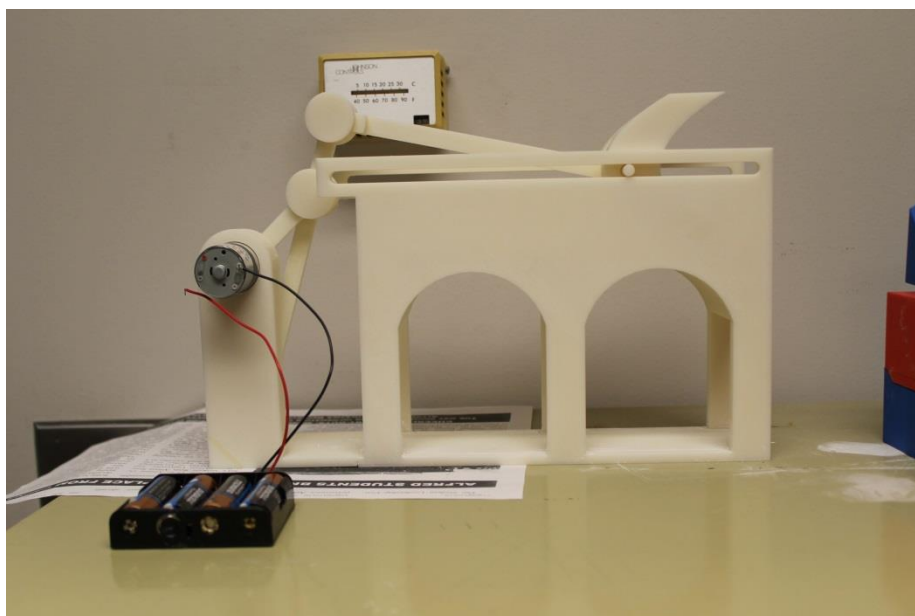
Front View of 3D prototype of the Quick Return Mechanism
